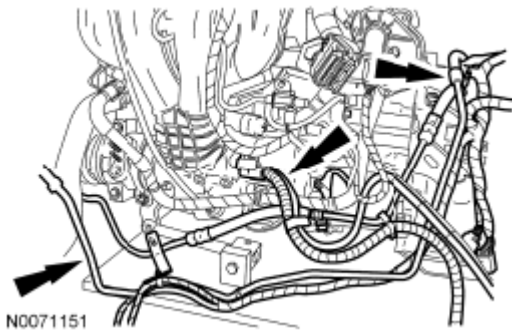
Locating Power Steering Tubes And Wiring Harness
